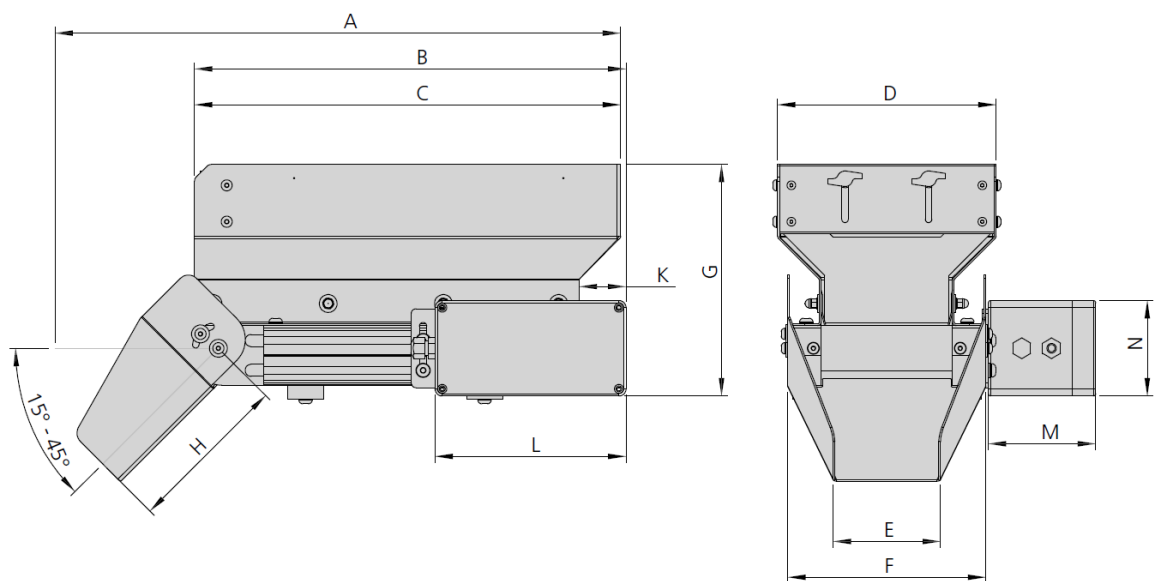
Dimensional drawing IBB3.5 / IBB 6
